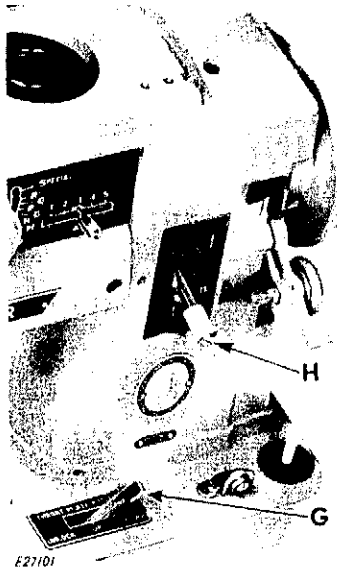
Machine Set for Sewing at 12 Stitches per Inch
